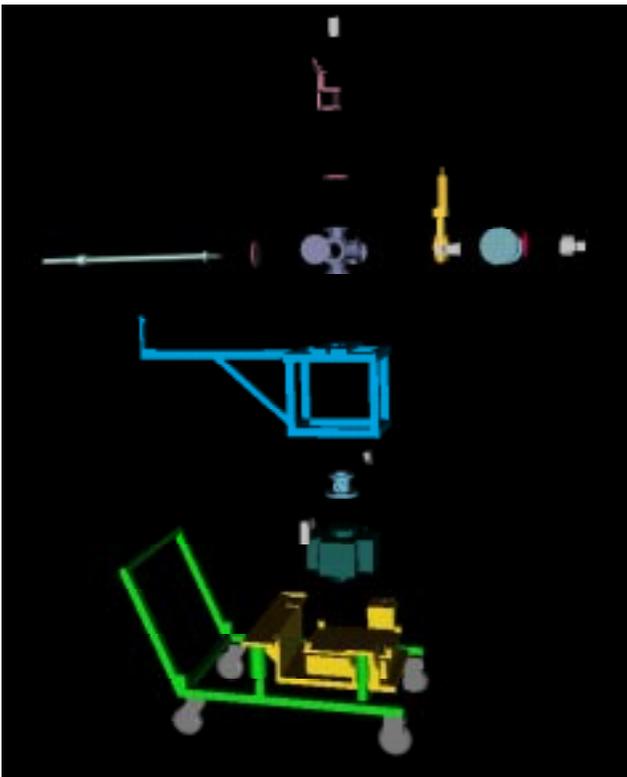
Exploded view of UHV system just before the start of assembly sequence animation.
